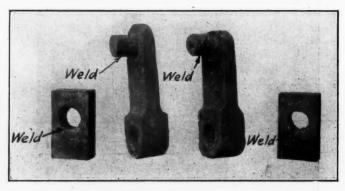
Hangers Shown in Fig. 13 with Metal Welded On.
